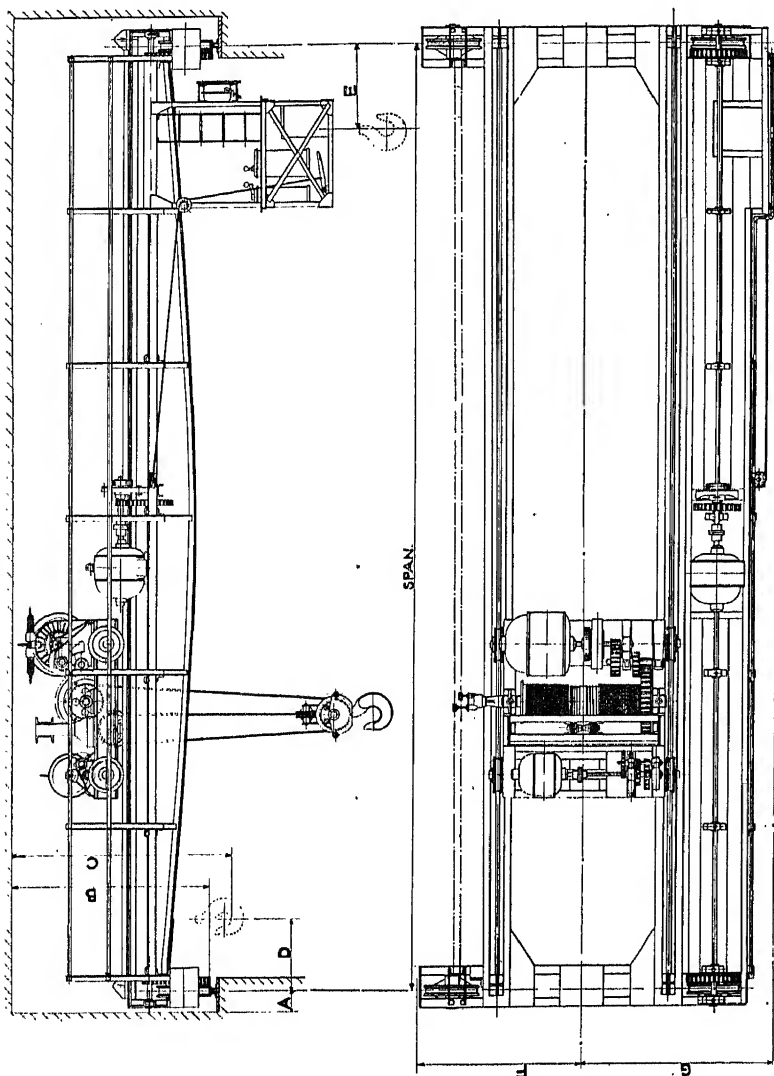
Overhead Electric Cranes: Dimensional Diagram.
